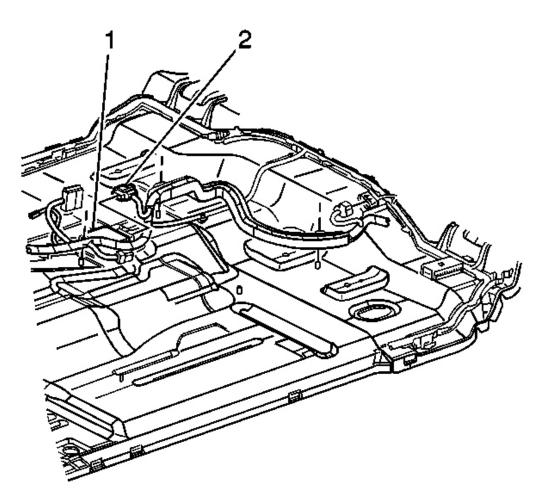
Locating Electrical Connector At SDM Courtesy of GENERAL MOTORS CORP.
